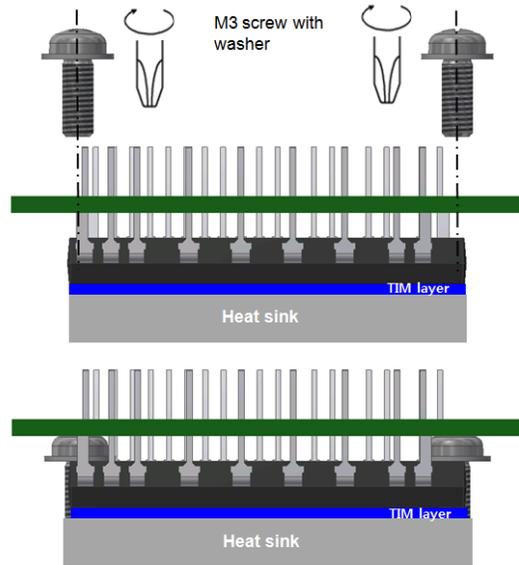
Process Flow of Soldering a SPM 45H Package (when PCB mounting first)
